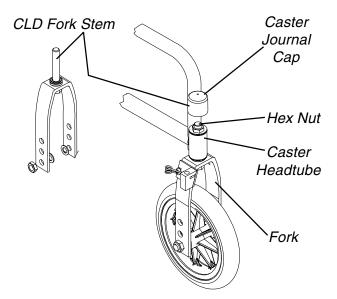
INSTALLING CLD FORK ASSEMBLY ONTO WHEELCHAIR
